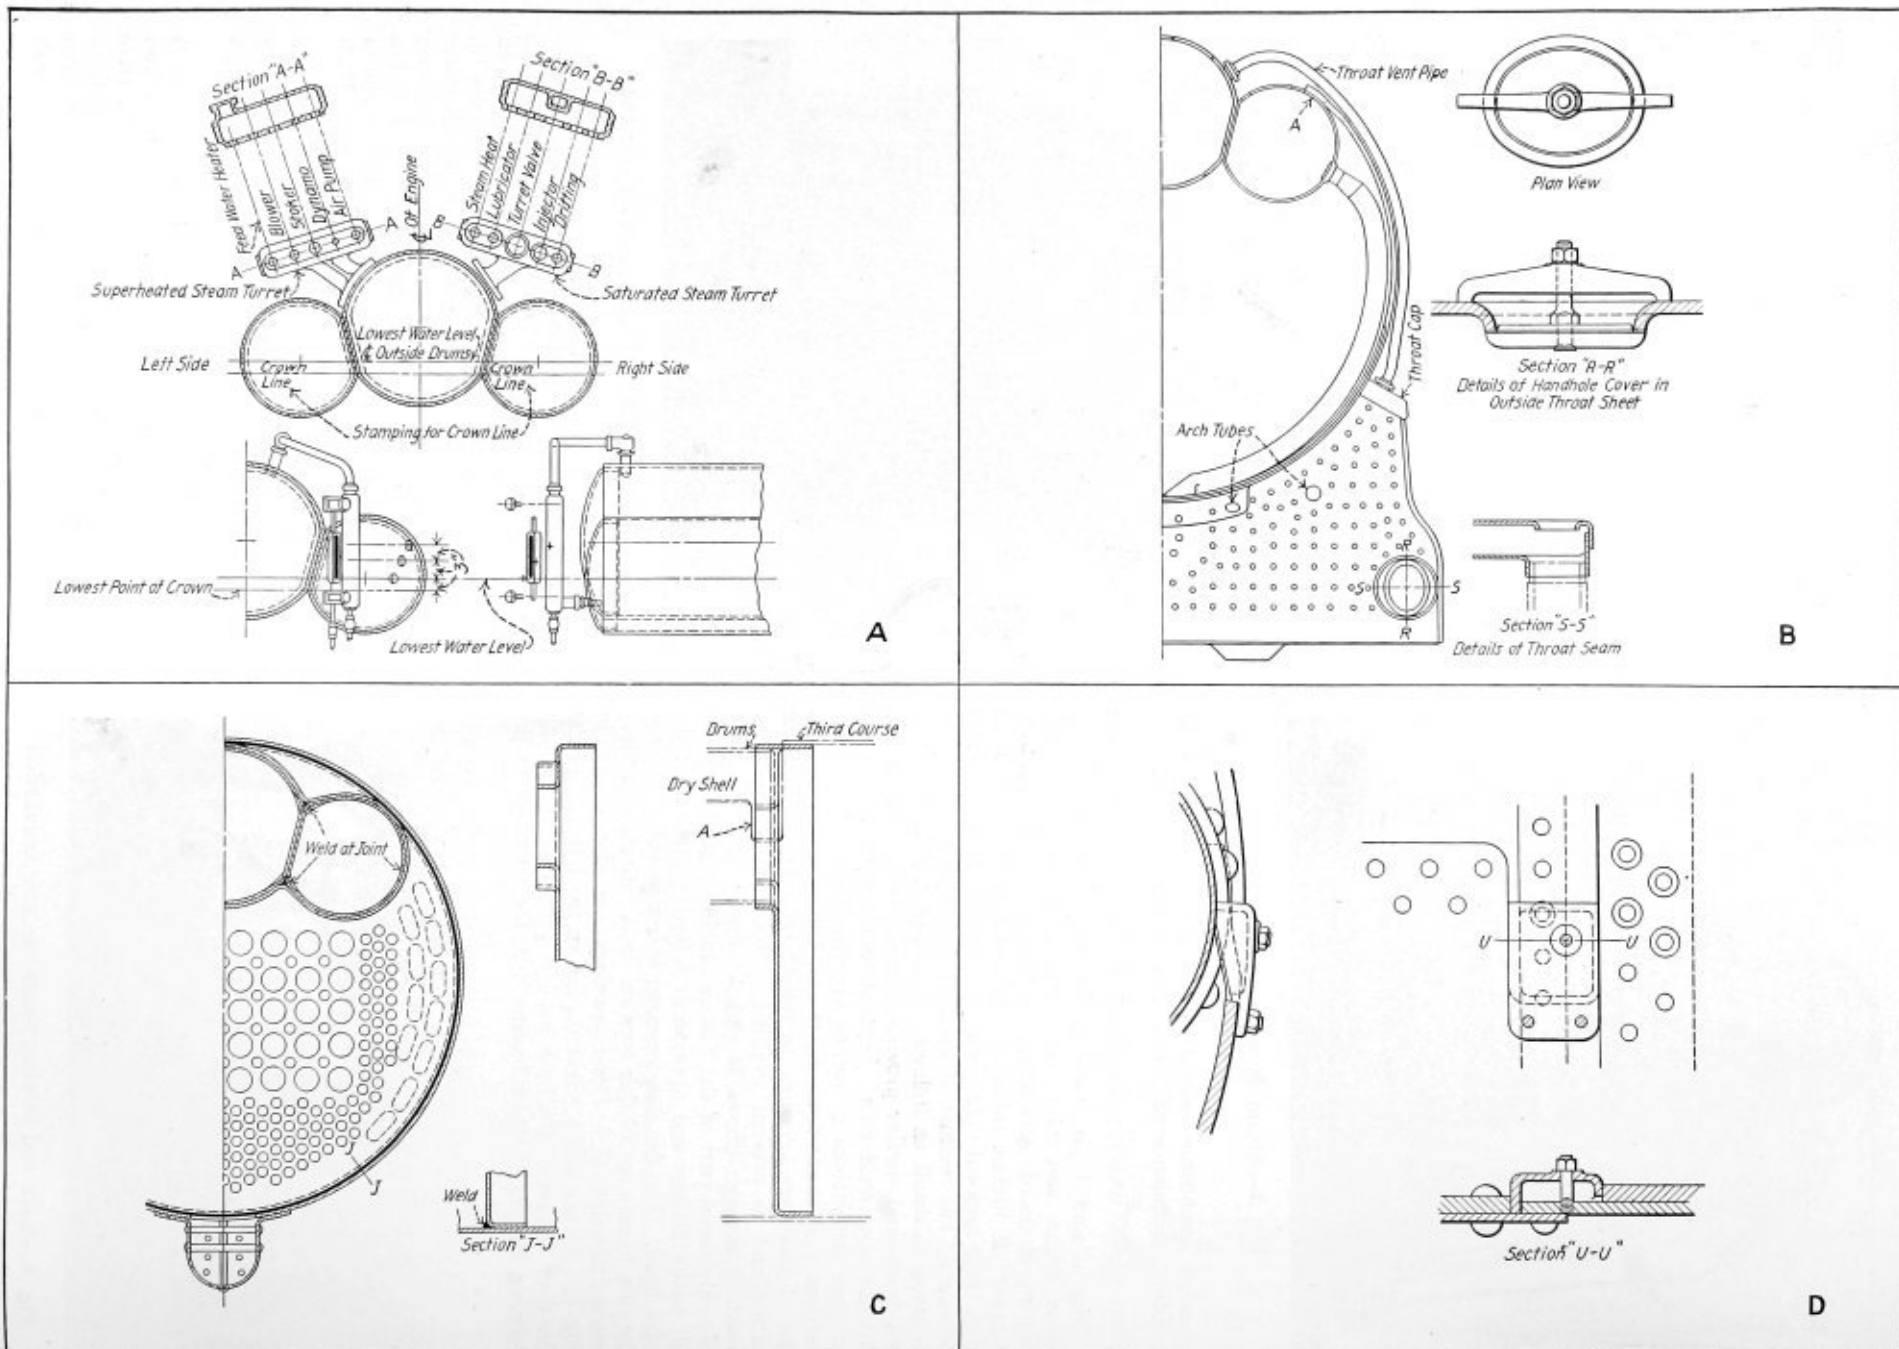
A.—Arrangement of turrets, water columns and water glass. B.—Combustion chamber and inside throat sheet. C.—Back tube sheet arrangement. D.—Cover plate application, third course and dry shell
